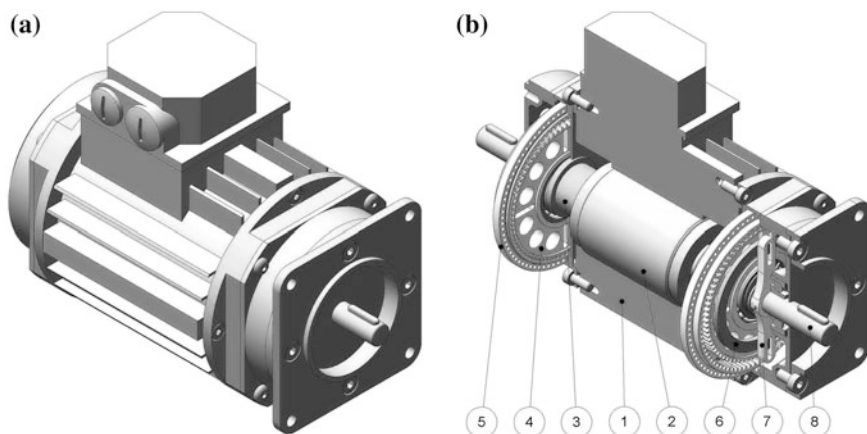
a electric motor with integrated gearbox. b internal structure: 1—stator with stator winding, 2—rotor, 3—eccentric cam, 4—planet wheel, 5—central gear with internal teeth, 6—Oldham coupling, 7—output shaft carrier, 8—continuous output shaft
